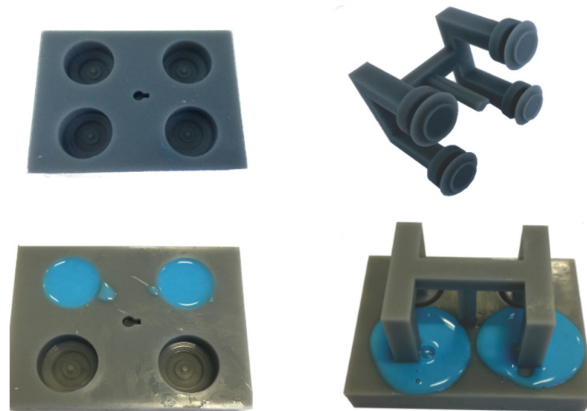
Fabrication of Blu-stuff elastomeric blister using 3D printed plunger and base mould
